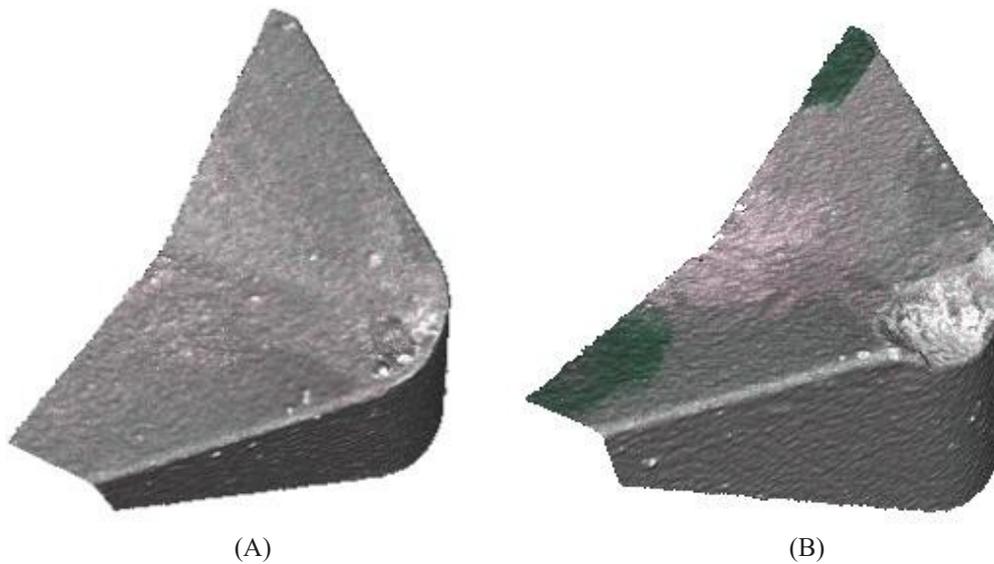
Tool wear for a 360 s machining period in (A) Conventional turning, and (B) Ultrasonic assisted turning
